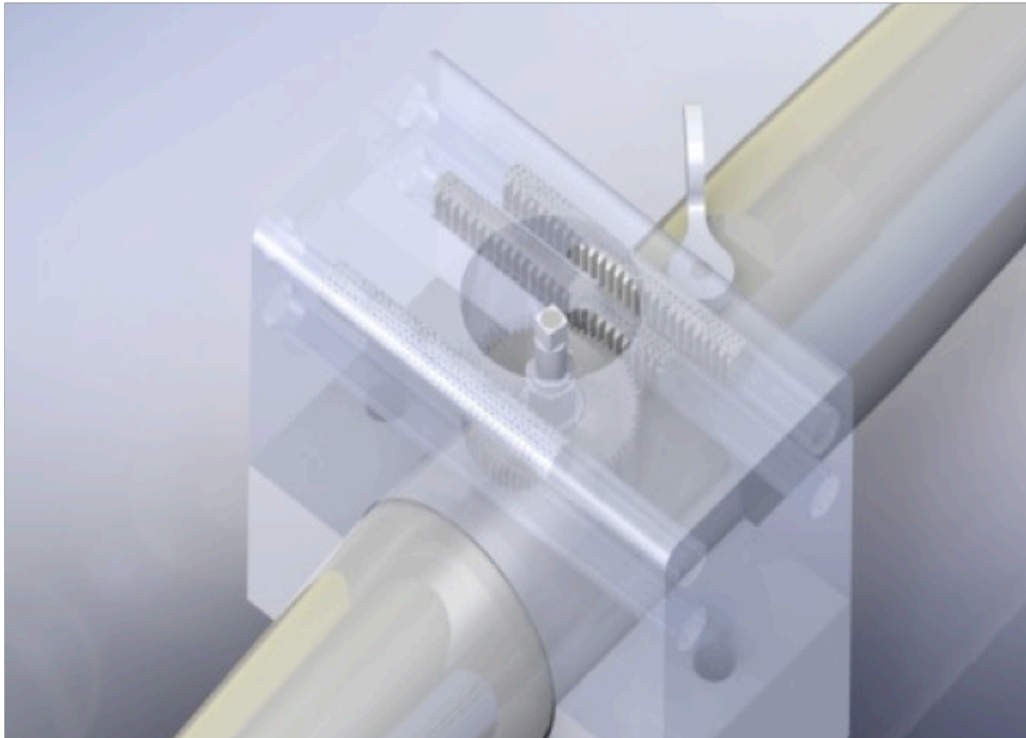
TEE interface for pseudo-fluid system, shown transparent with top gear and bottom racks removed to show detail.
